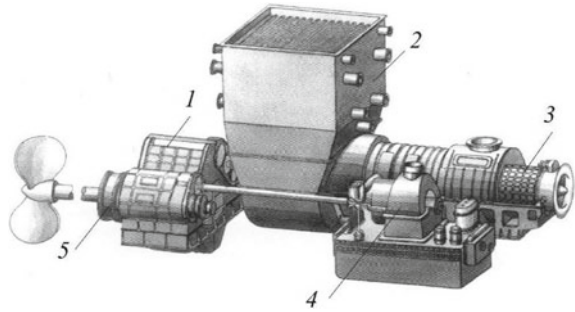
M25 gas turbine unit. 1—gear; 2—HRSG; 3—gas turbine engine; 4—steam turbine; 5—clutch
